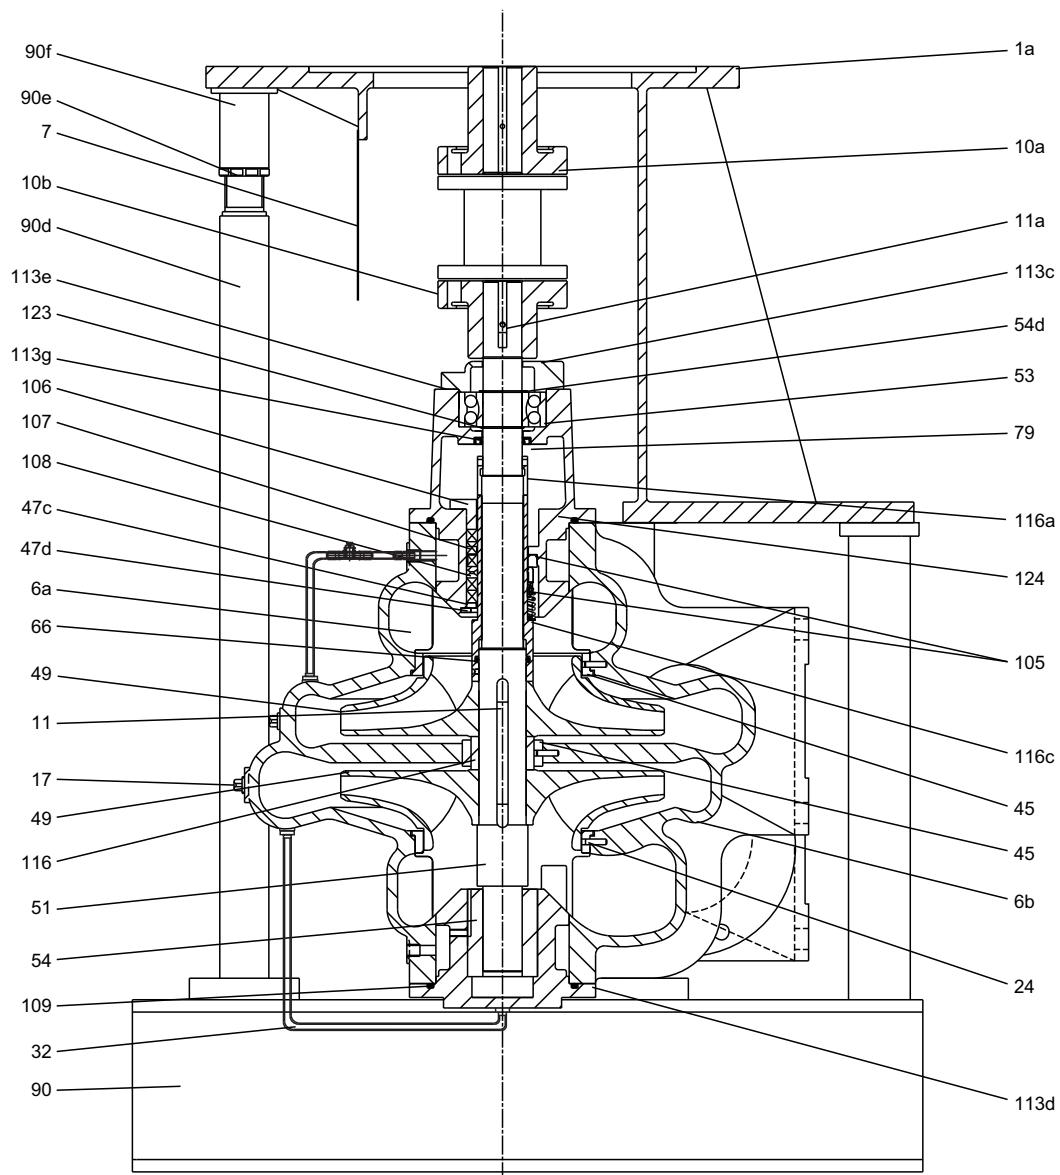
Sectional drawing, standard construction type 8, motor frame size from 355 to 400
